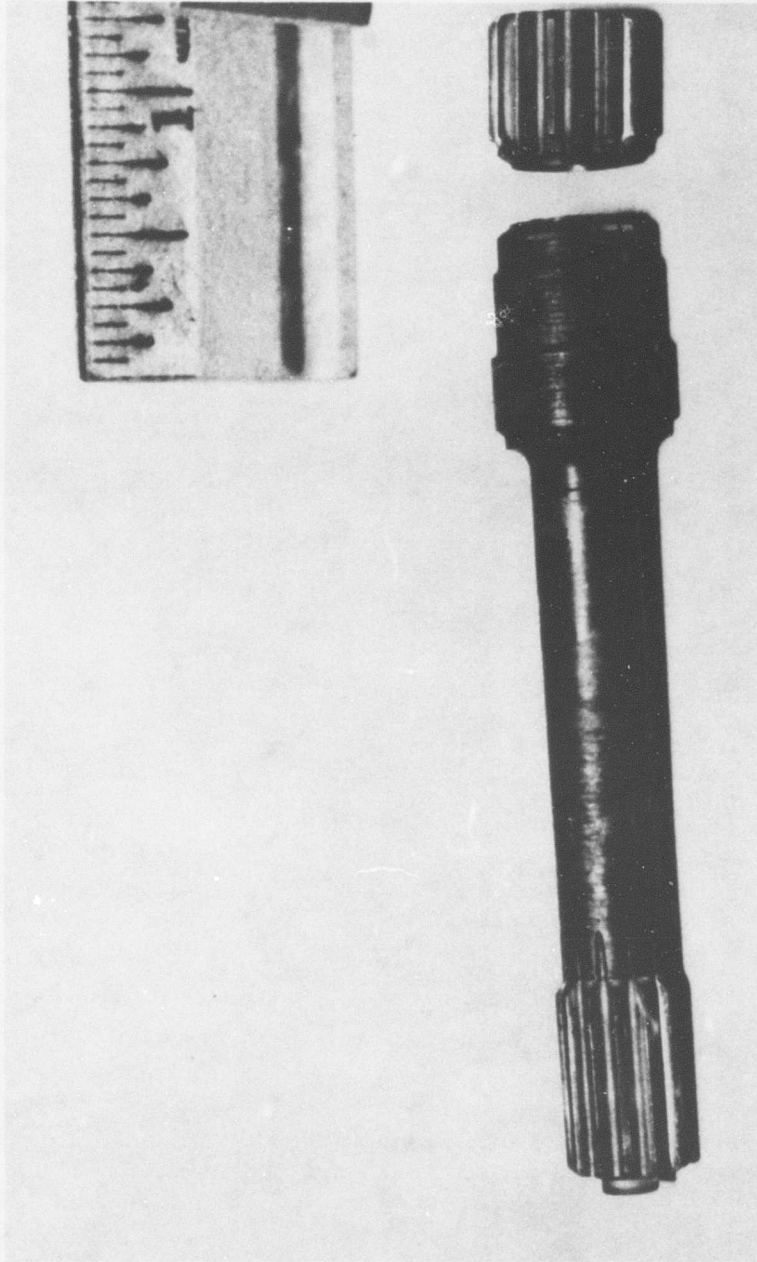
Fuel Pump Drive Shaft Showing Failure at Shear Section.
